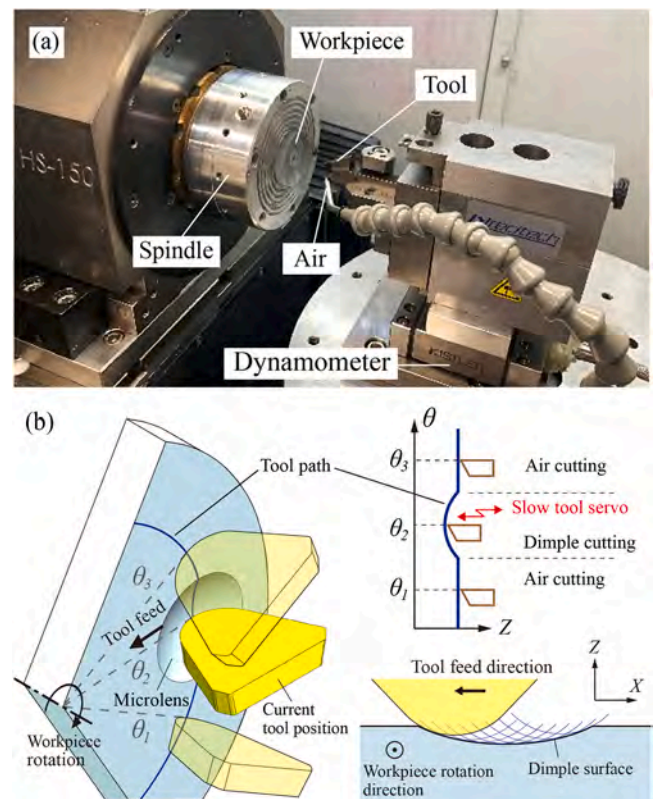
Experimental setup of diamond turning: (a) photograph of the cutting system, and (b) schematic of the fabrication process of a concave microlens by slow tool servo.
